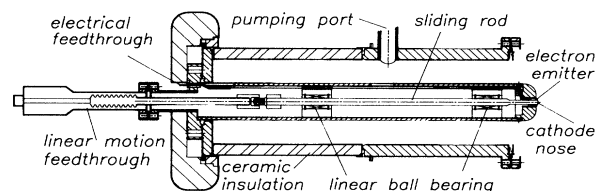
Cathode assembly of a mechanically adjustable magnetron injection gun.
